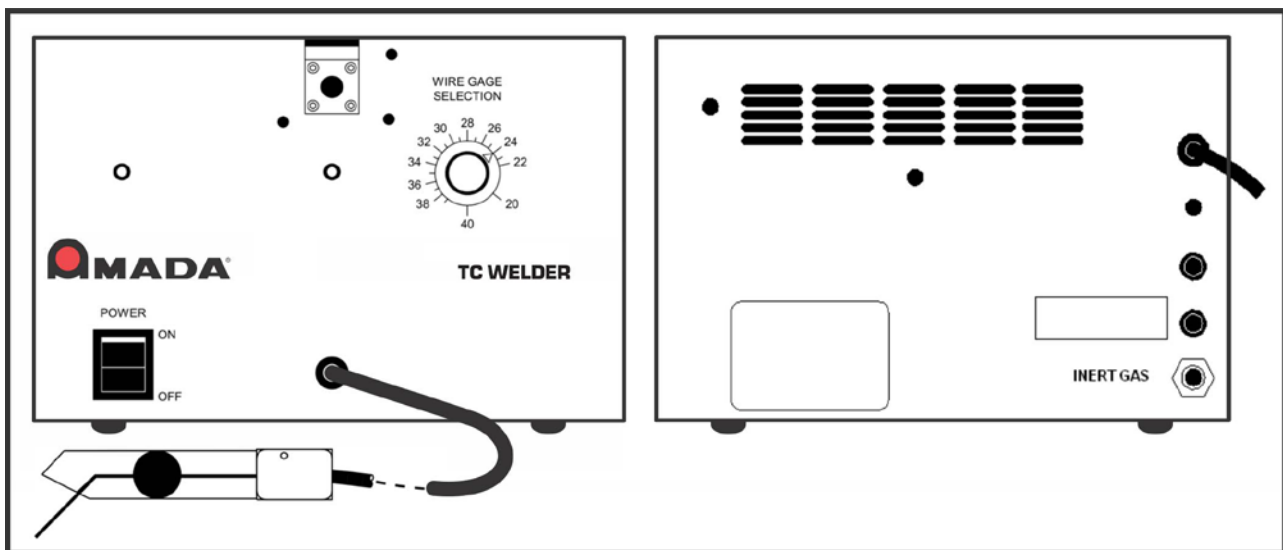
Front and Back Views of Thermocouple Welder.
